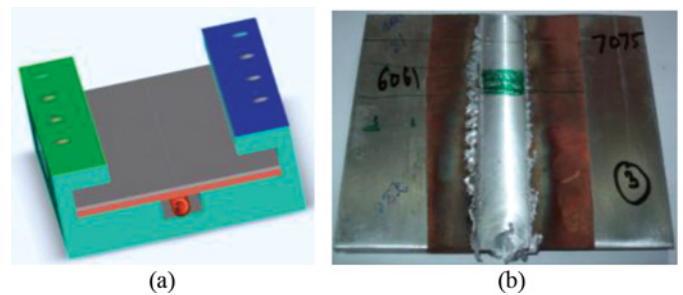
(a) Solid model of the designed fixture with heating element. (b) Weldment exhibiting the temperature effect (color figure available online).
